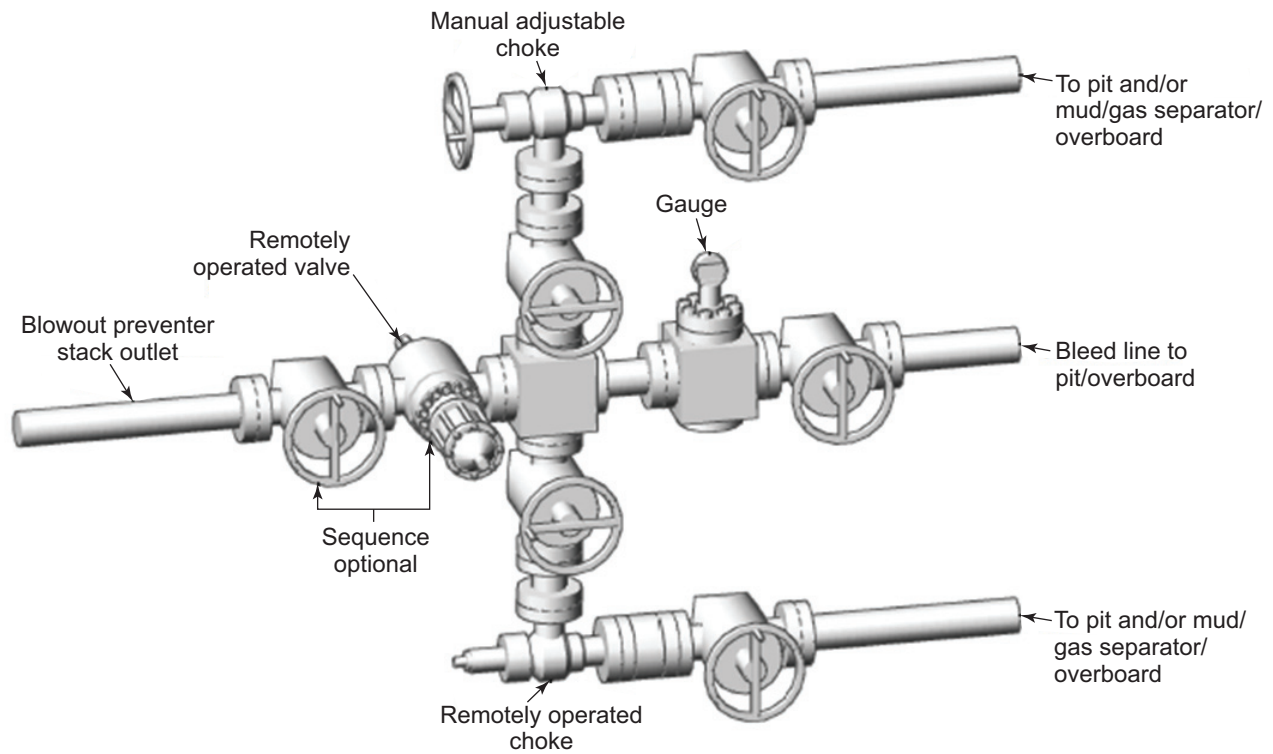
Example Choke Manifold Assembly for 5K Rated Working Pressure Service—Surface BOP Installations
